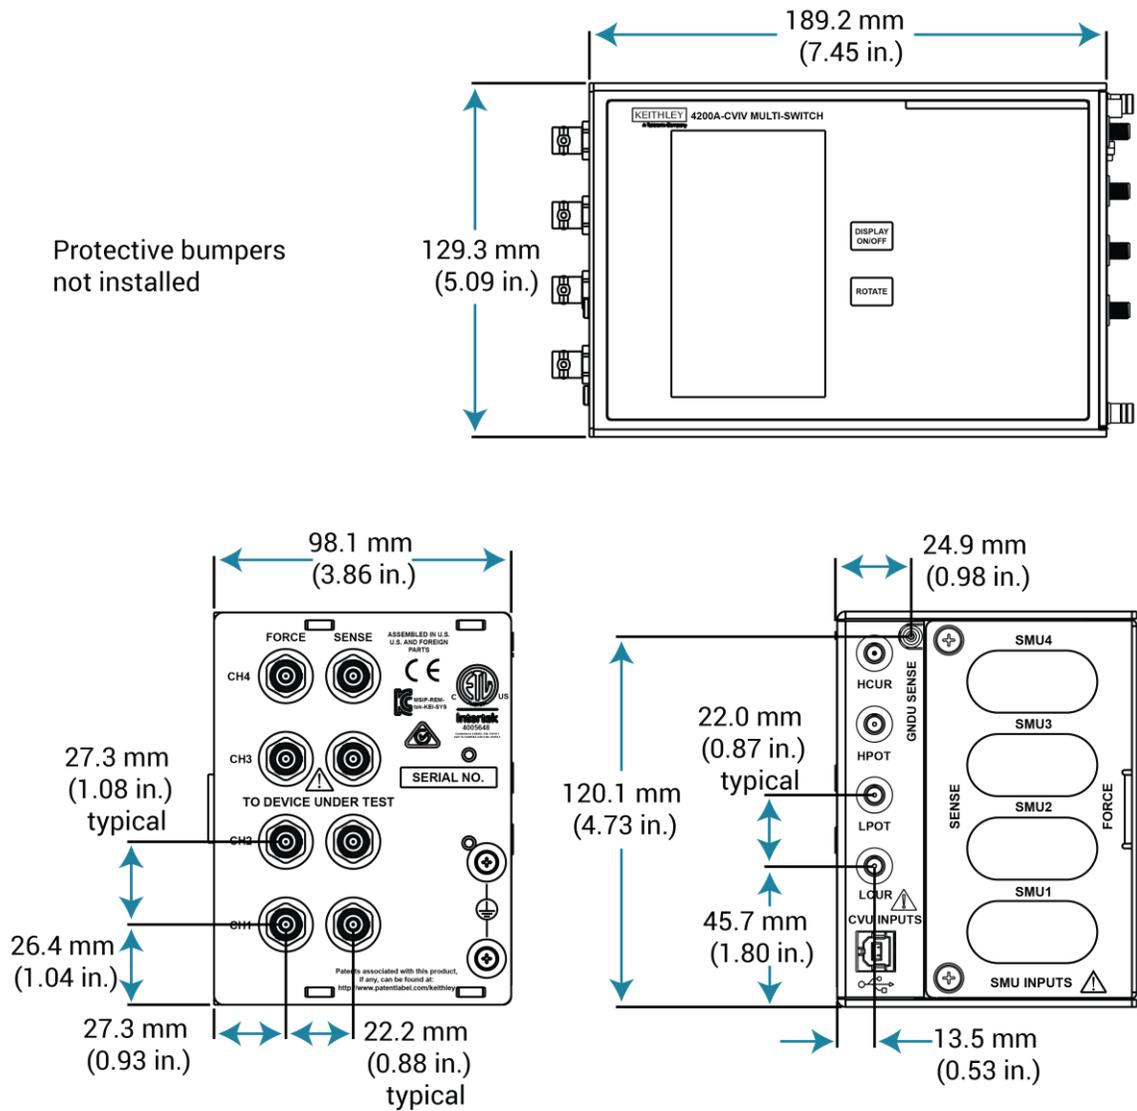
4200A-CVIV mechanical dimensions, bumpers not installed
